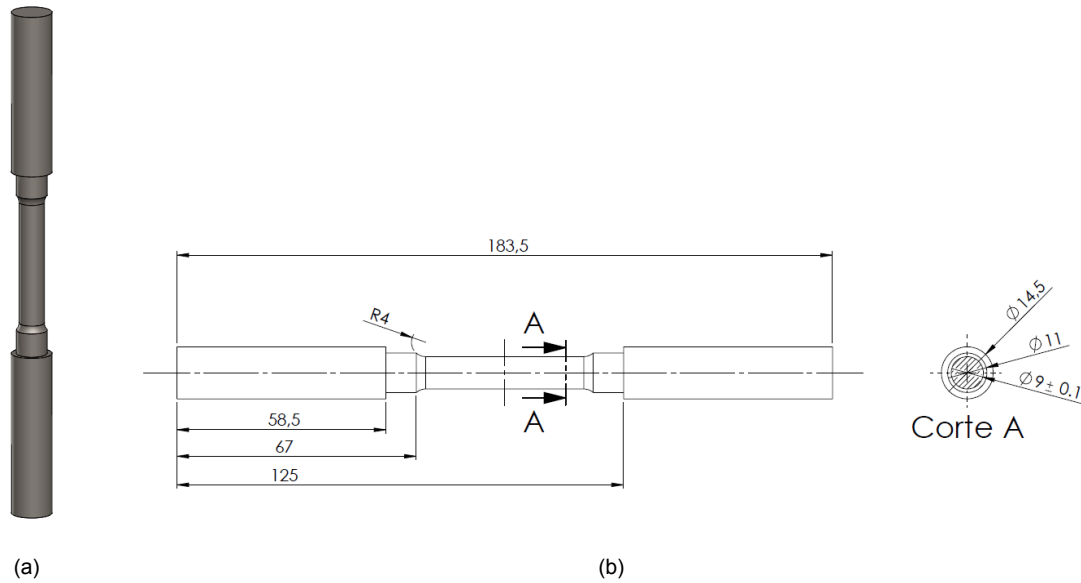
Tensile specimen (a) Render; (b) Technical drawing.
